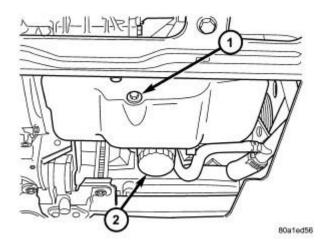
Engine Oil Drain Plug and Oil Filter Courtesy of CHRYSLER LLC
